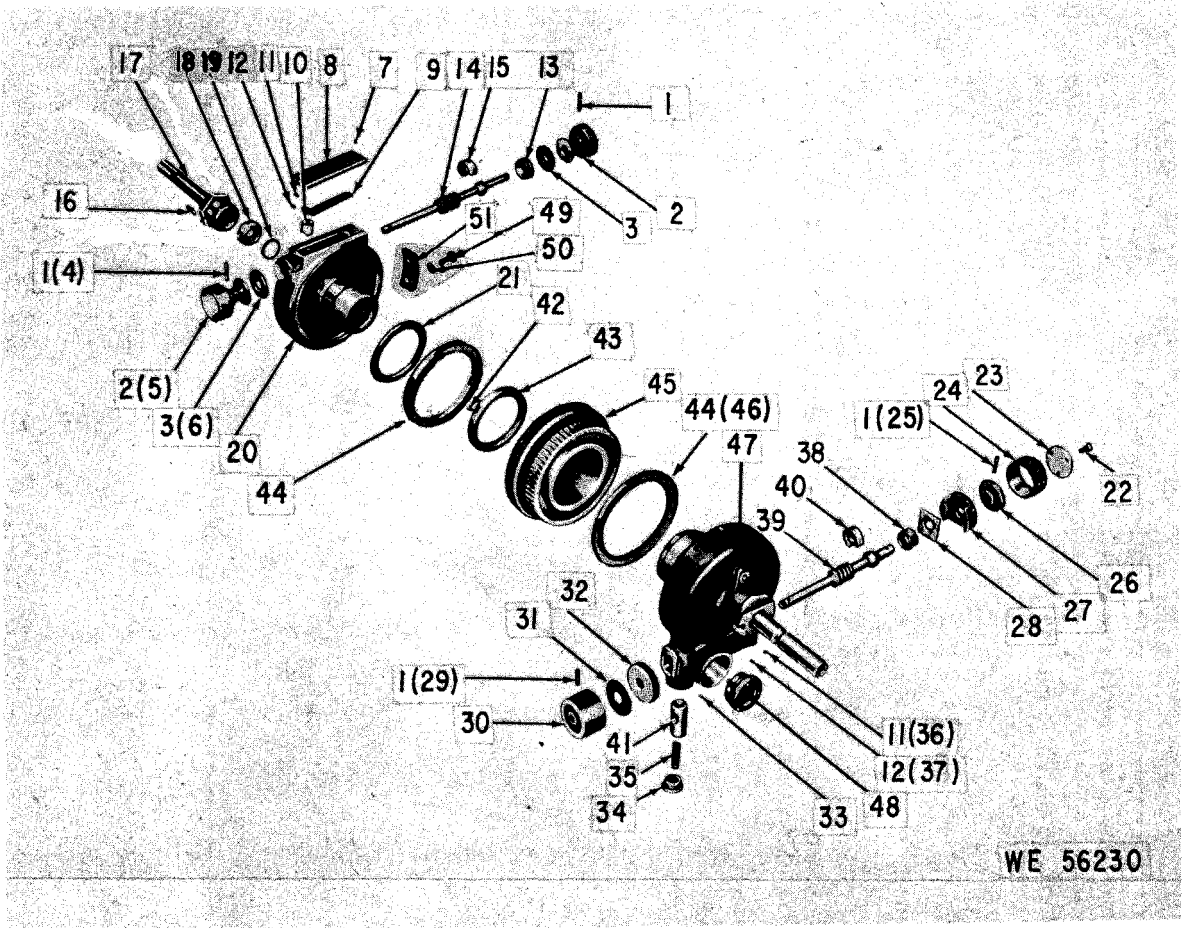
Housing 6583169 and spindle assembly 5635924 with related parts-exploded view.
